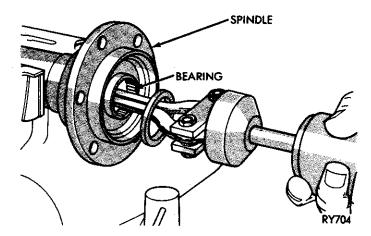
Needle Bearing Removal (Right-Side Spindle) knuckle arm to loosen it from the steering knuckle. Remove steering knuckle arm.
